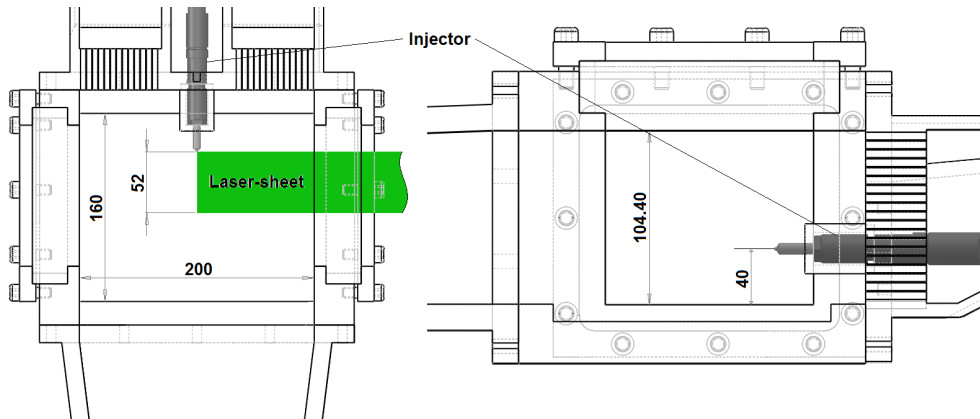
Cold spray testing section with single-hole nozzle injector and optical accesses.
